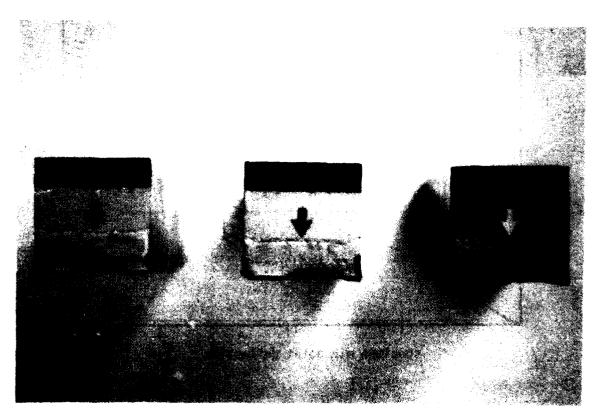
Test specimens showing tinting (specimen on right) and use of fatigue loading to define narrow strip of crack extension; (two specimens on left).
